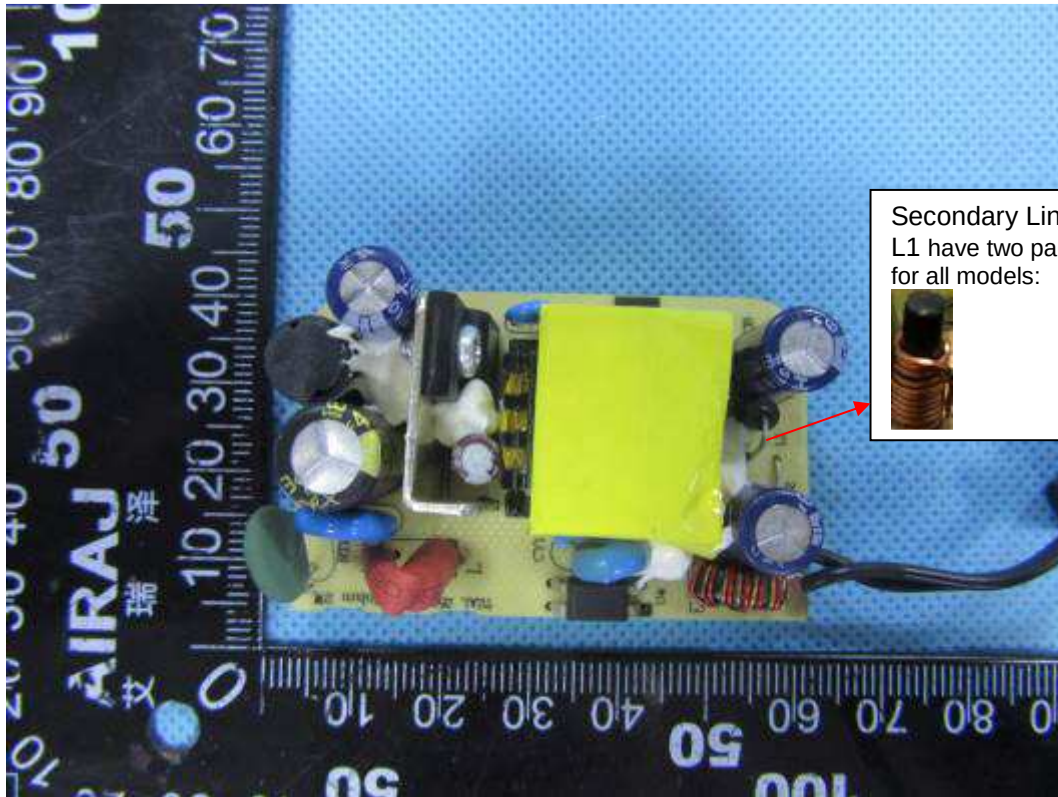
PCB top view of FJ-SW726GxxxxyyyB
